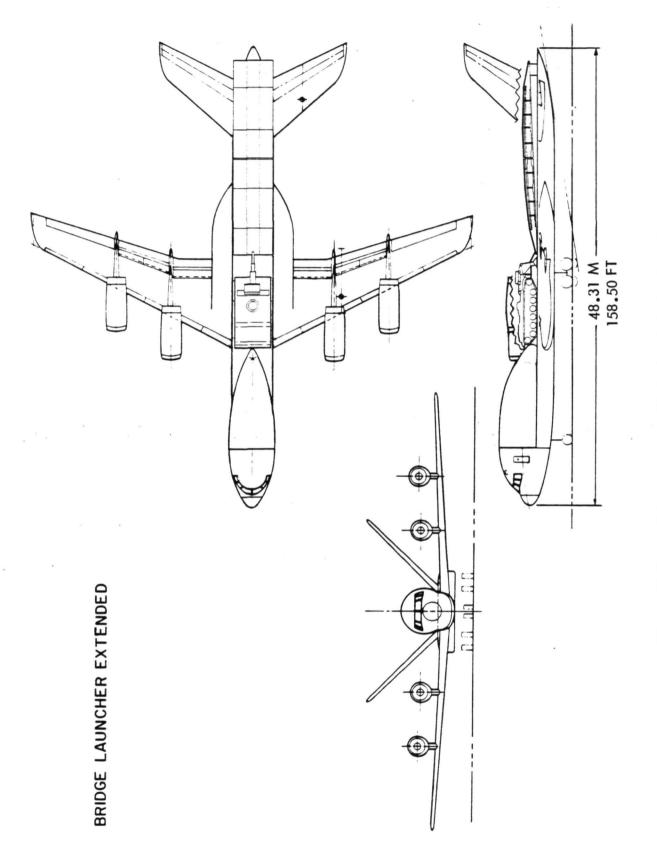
General Arrangement - Flatbed with Bridge Launcher
